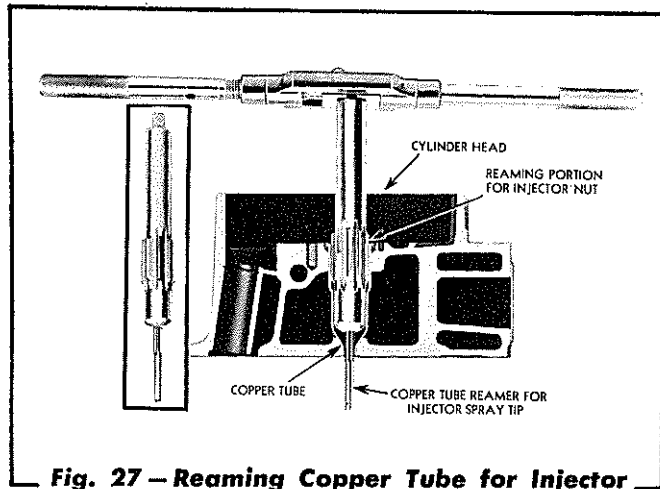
Reaming Copper Tube for Injector Body and Spray Tip
